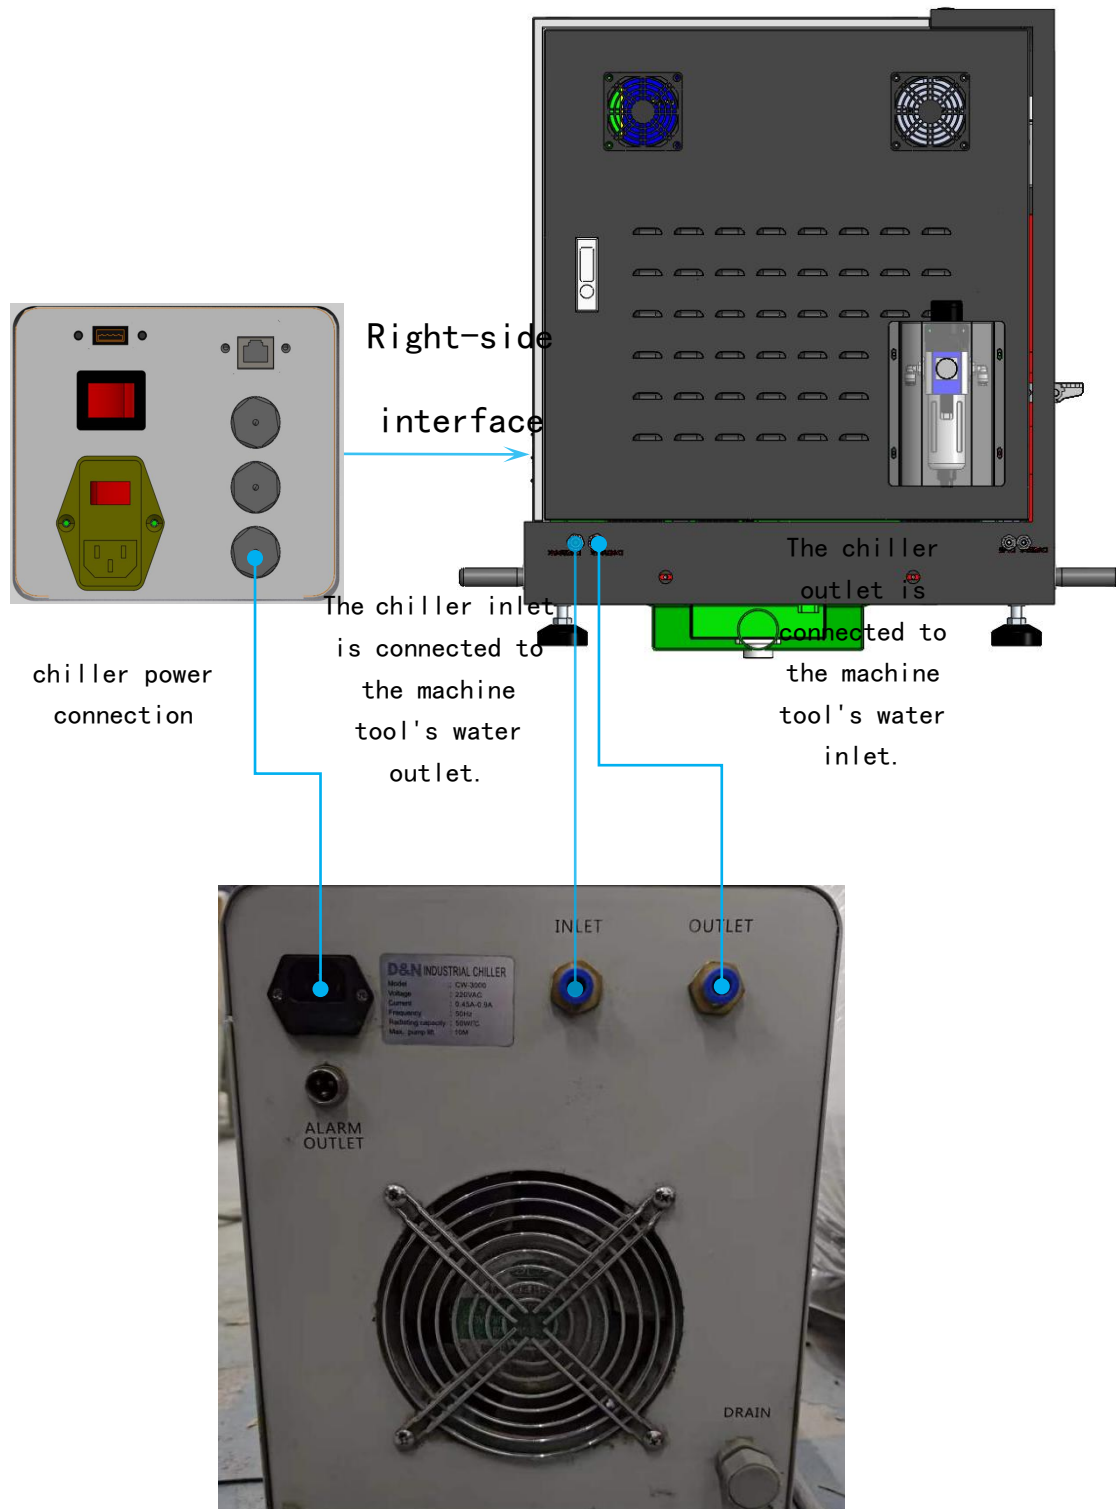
Chiller and Machine Tool Connection Diagram
